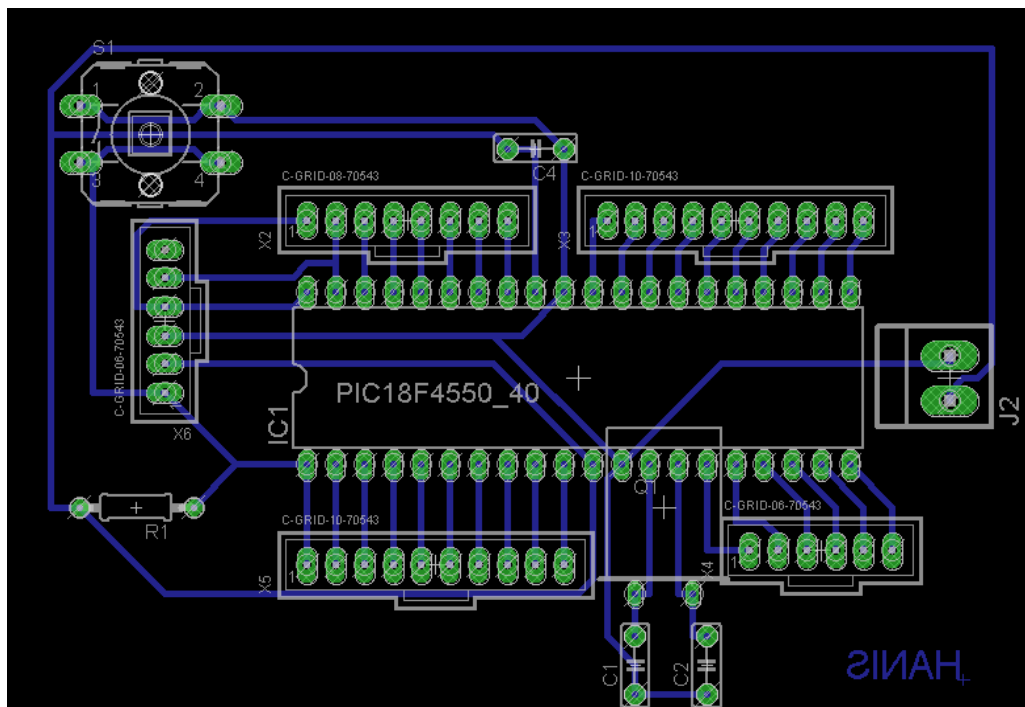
Basic Circuit connection of target boards in EAGLE PCB Layout (Board Diagram)
